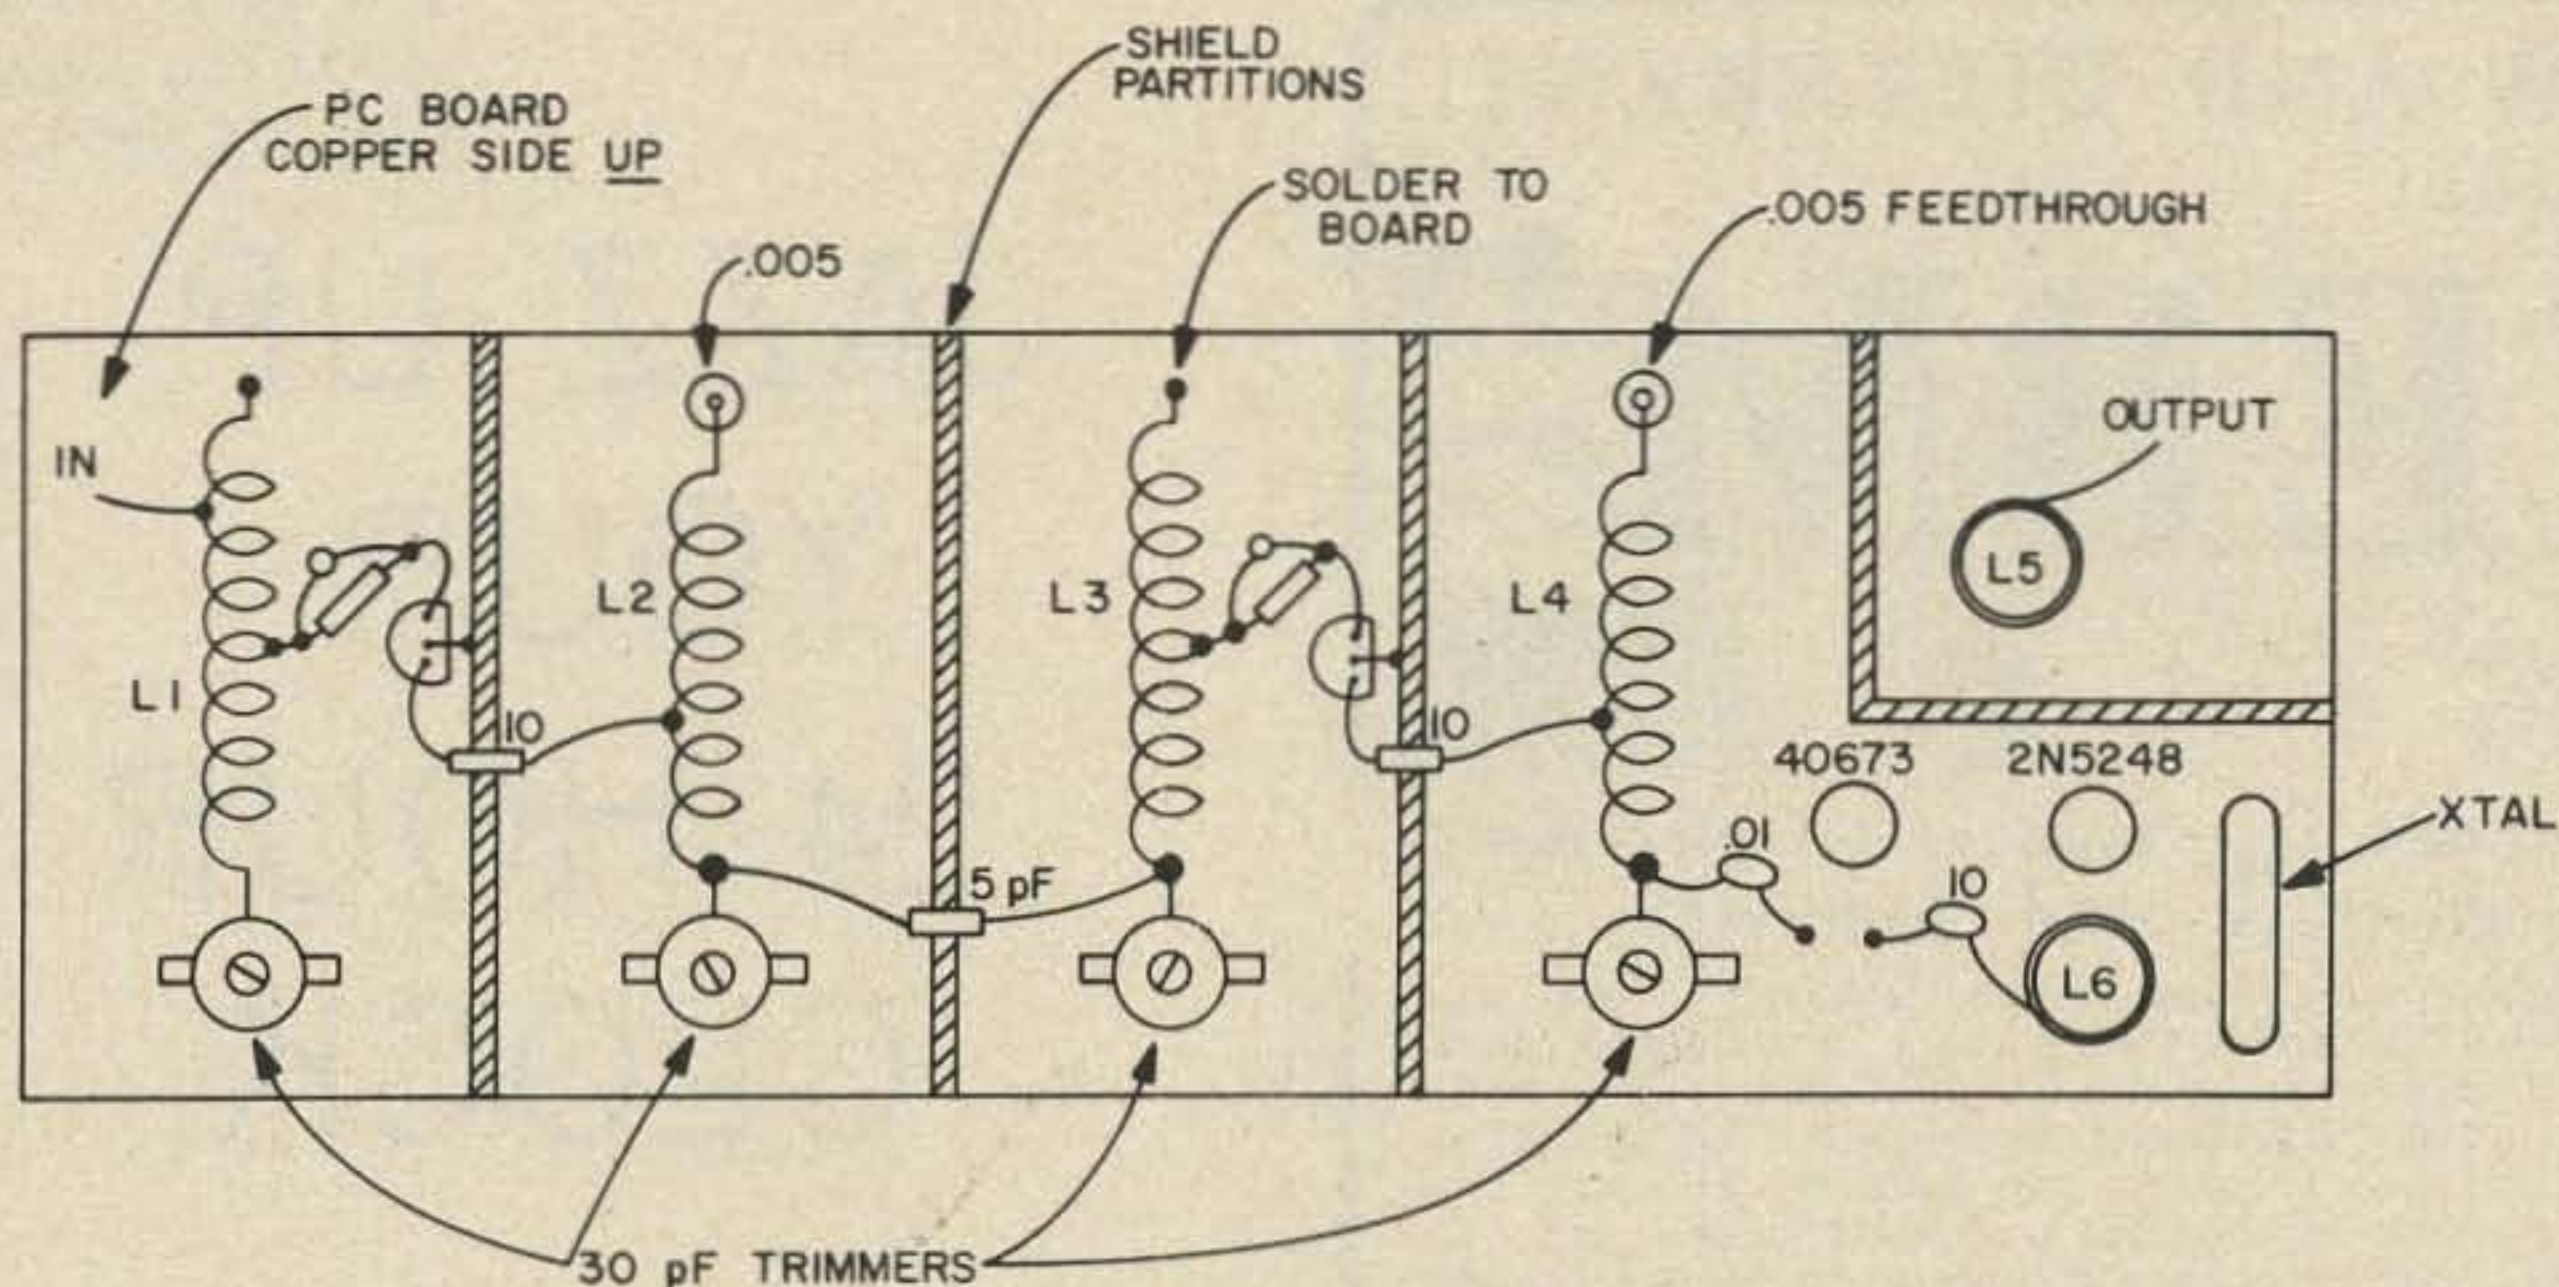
Parts layout. Exact layout shown need not be followed but shields should be placed between coils shown. Remaining components, as explained in text, are places on underside of board.
